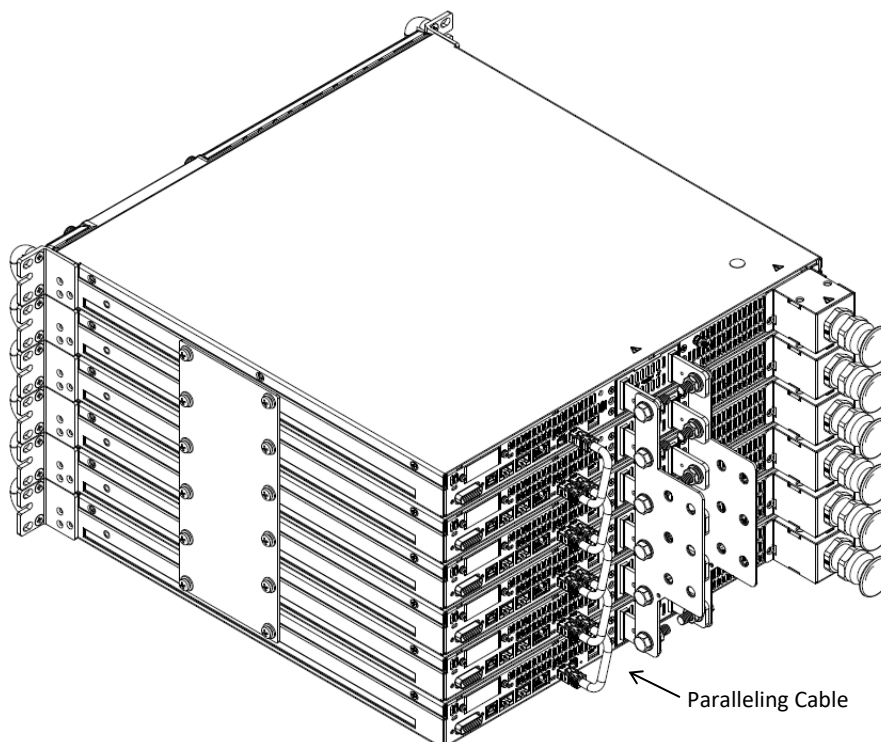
Six 60V-100V Units Connection Plates 6U Assembly
